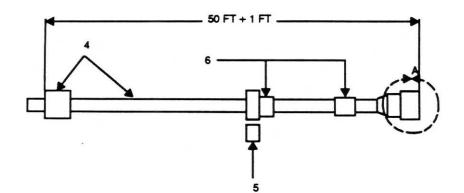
Cable Assembly - AH-64 to DAU (29304600)
